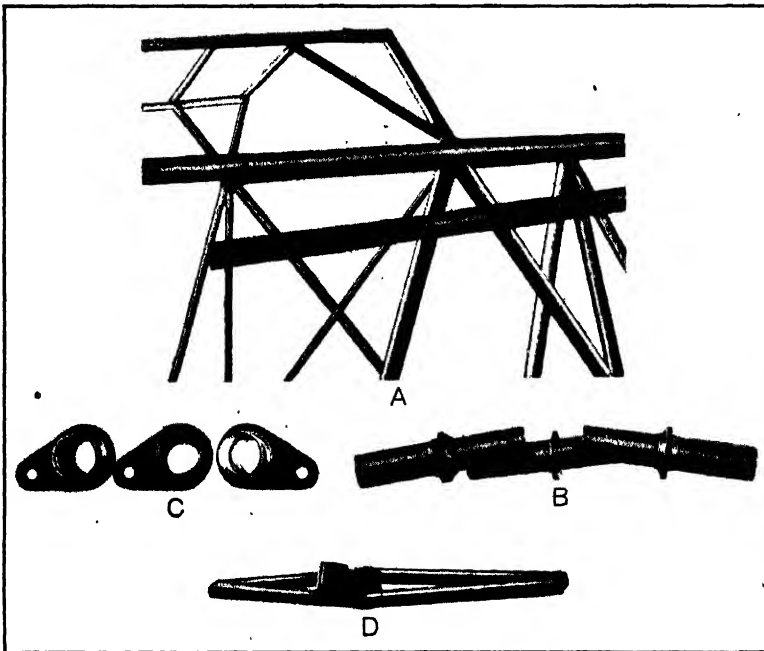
Example of Butt-welded Longerons Showing how Tubing Diameter is Reduced from Front to Rear at A, B and C Show Method of Welding Thick Plates to Sleeves, then Welding Sleeve to Tube. D—Cross Brace for Tail Skid Swivel Post Support Showing Removable Bronze Bushing to Take Wear.
